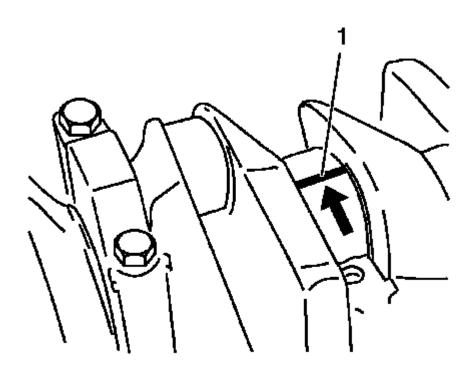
Plastigage On Bearing Journal Courtesy of GENERAL MOTORS COMPANY
